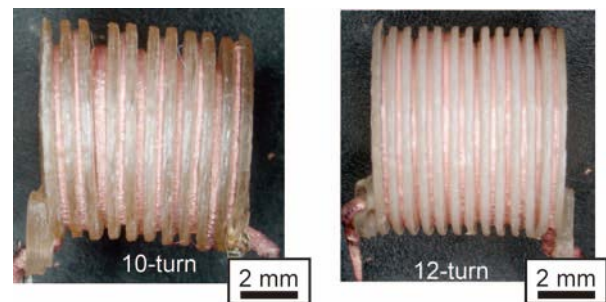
Photographs of the fabricated 10, 12-turn step-shaped micro coils.
